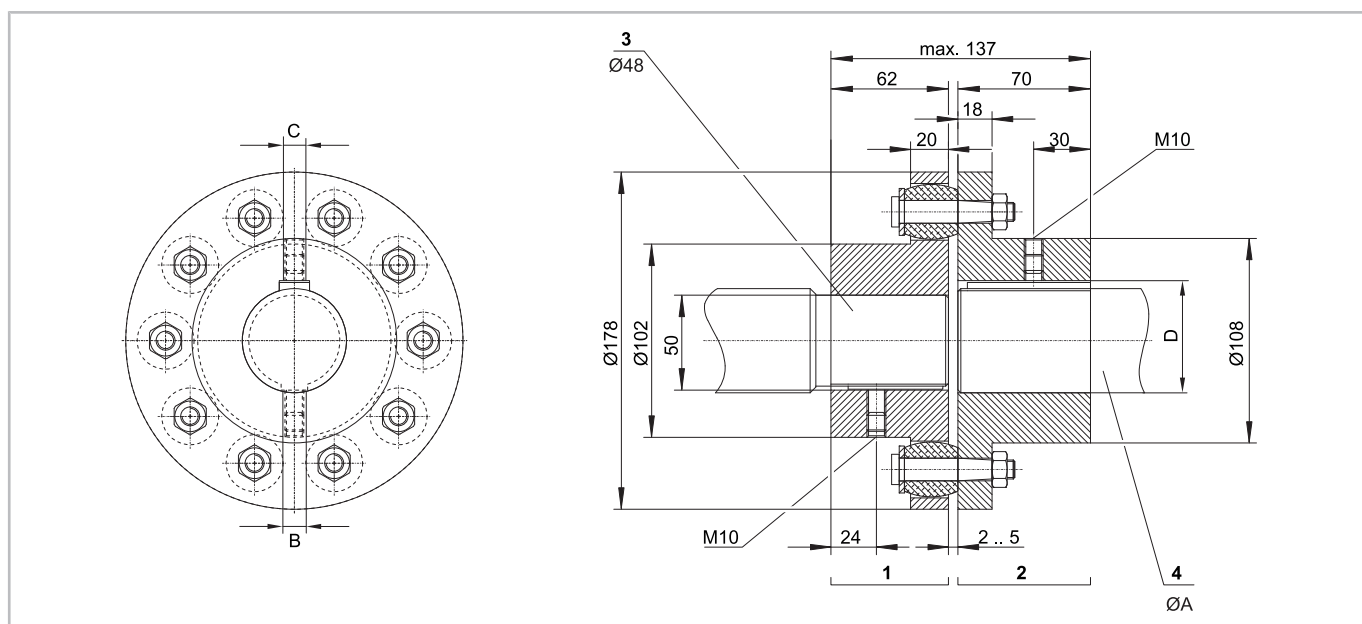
Dimensional drawing of coupling KS730 incl. KS730EX
